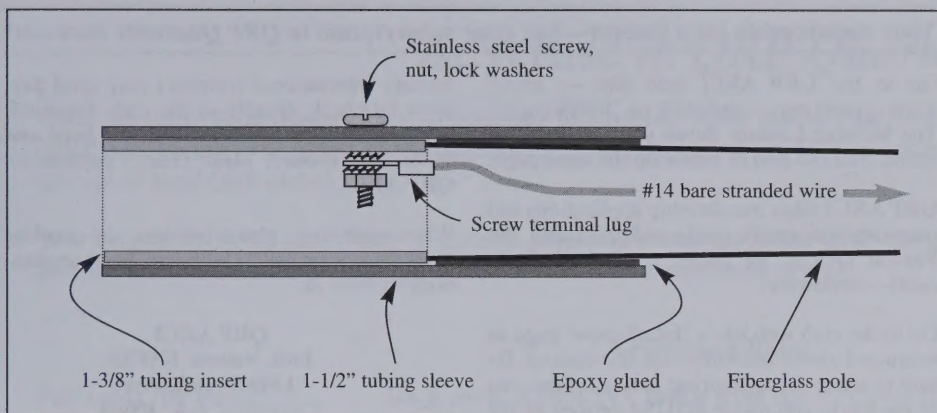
Cross-section drawing showing details for attaching the wire inside the sleeve. With a second, smaller diameter piece of aluminum tubing, I got the needed 1-1/4" I.D. to mate with the loading coil assembly.
